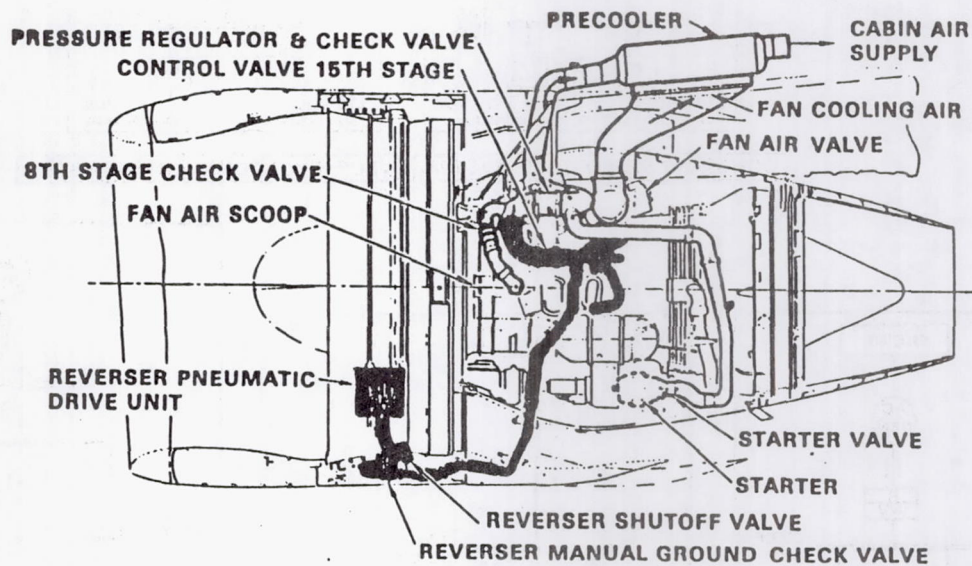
Powerplant assembly - P&W JT9D-7R4.
